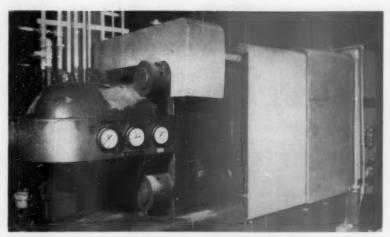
Die casting machine with metal splash guard that covers casting operation completely and actuates machine when closed. (Courtesy Western Electric Co.)
